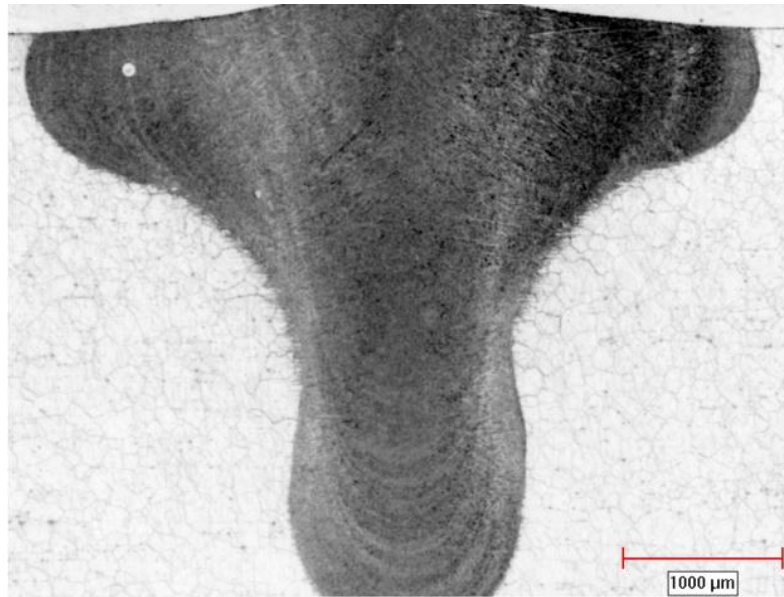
Optical micrograph showing cross-section of weld produced using a 2.5kW laser power and a welding speed of 0.5 m/min
